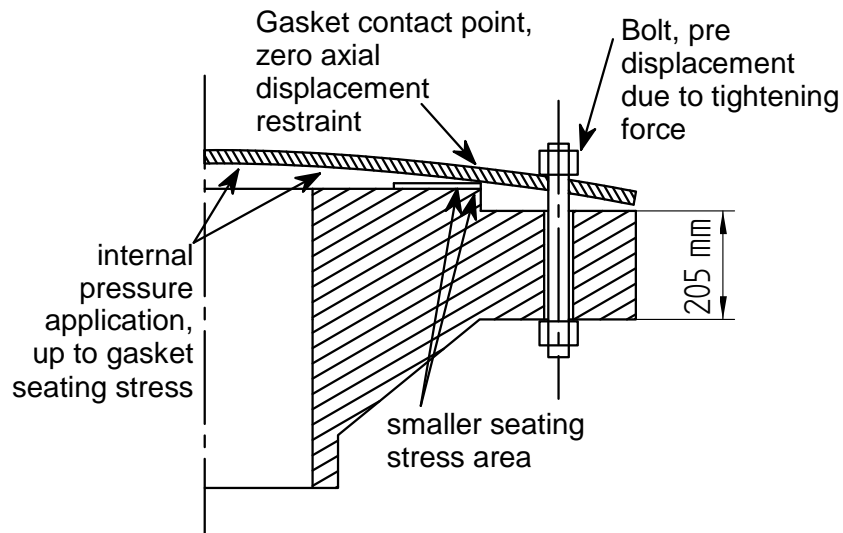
Sketch of the exaggerated deformation of the weld neck sealing flange assembly.
